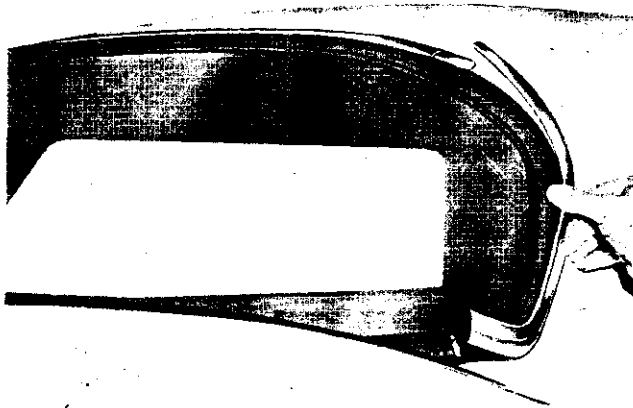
Removing the Lower Rear Window Moulding (Imperial)
